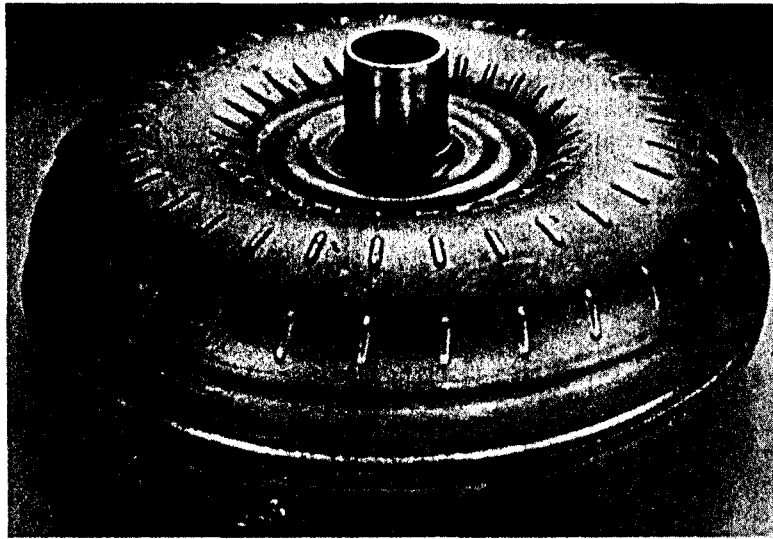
Torque Converter Assembly Welded with a Nonvacuum Electron Beam Welding Machine (Welds Made to Hold Vanes in Place)
